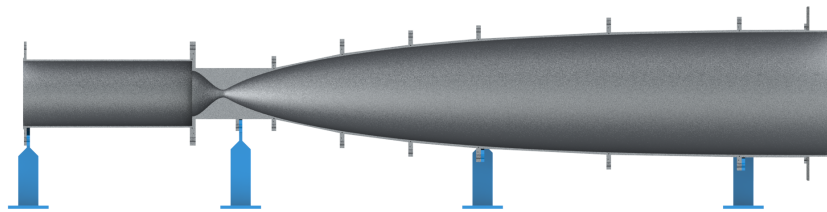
Full assembly of the Mach 8 axisymmetric nozzle, section view.
